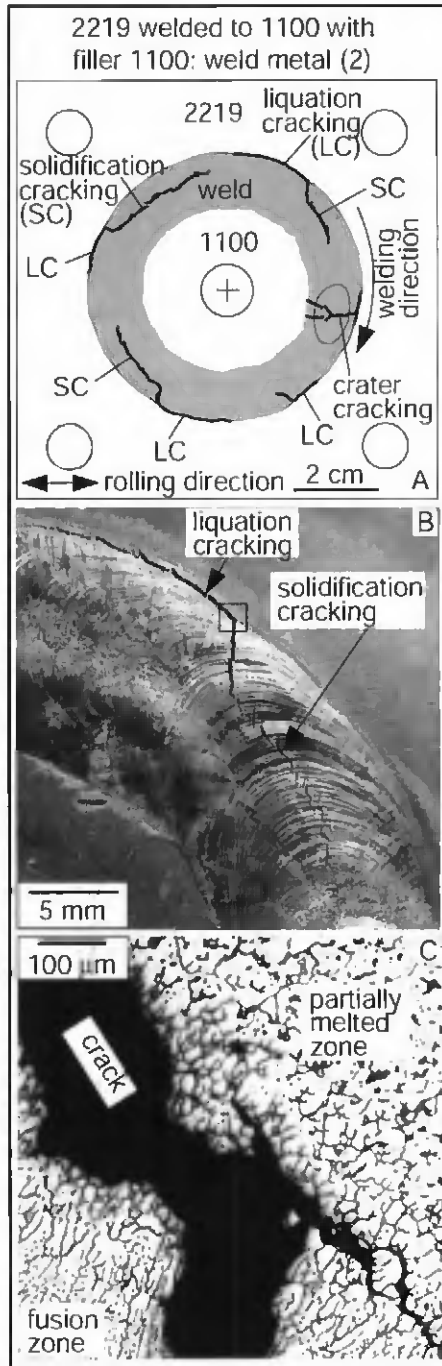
Weld made between Alloy 2219 (outer piece) and Alloy 1100 (patch of 50.8 mm diameter) with filler metal 1100. A — Overview; B — macrograph; C — micrograph of area in square in B.
